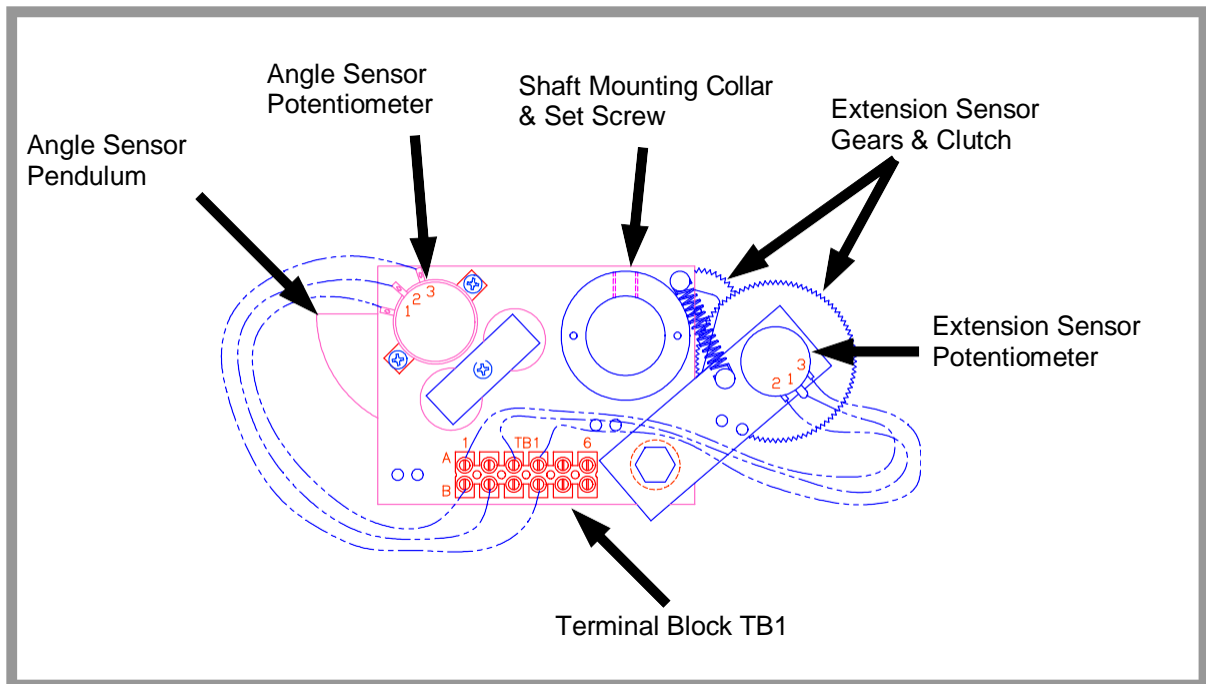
SENSOR BASEPLATE ASSEMBLY
